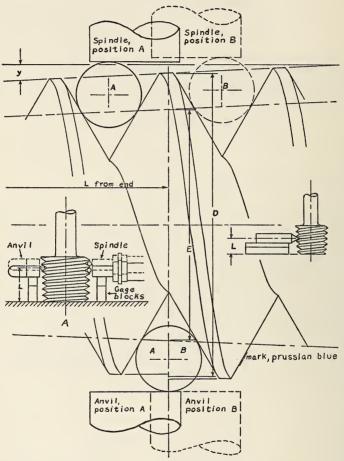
Measurement of pitch diameter of taper thread gages by the 2-wire method.
